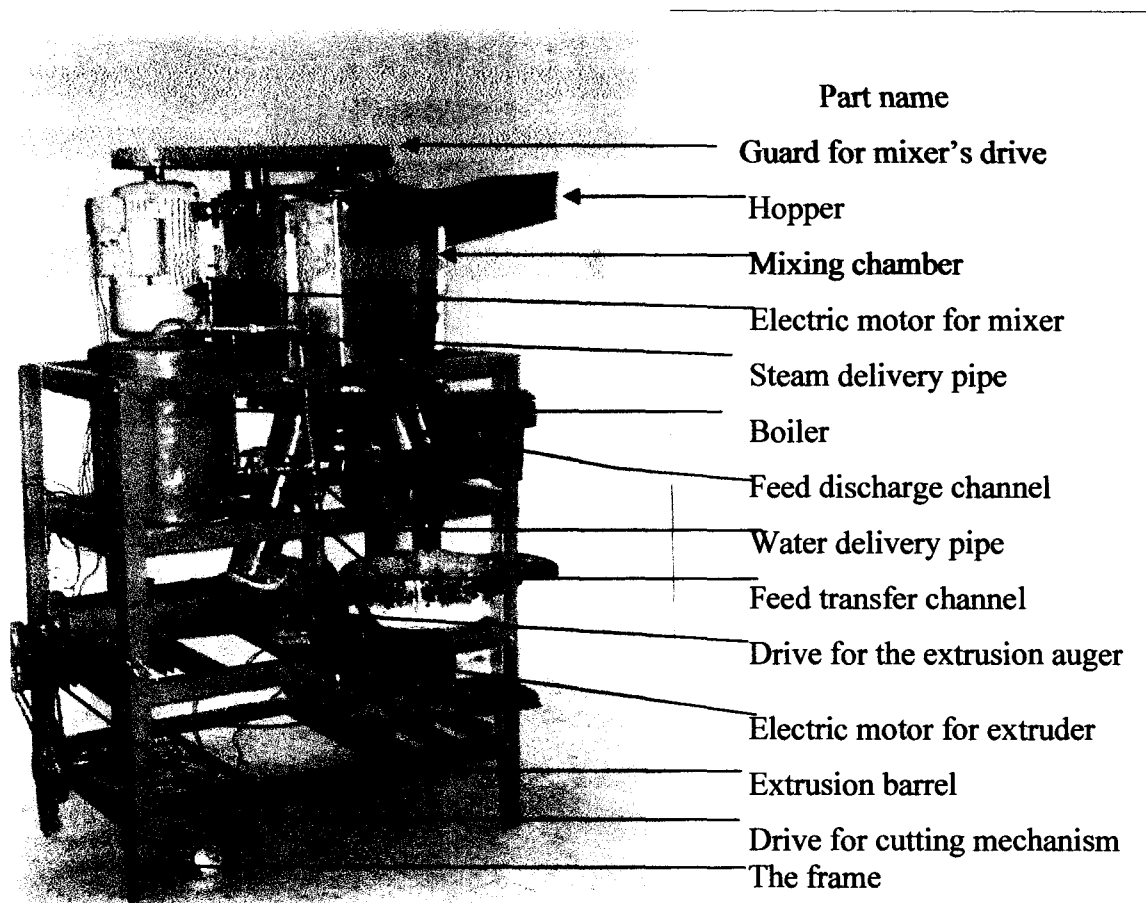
Pictorial view of the mixer-pelleting machine
